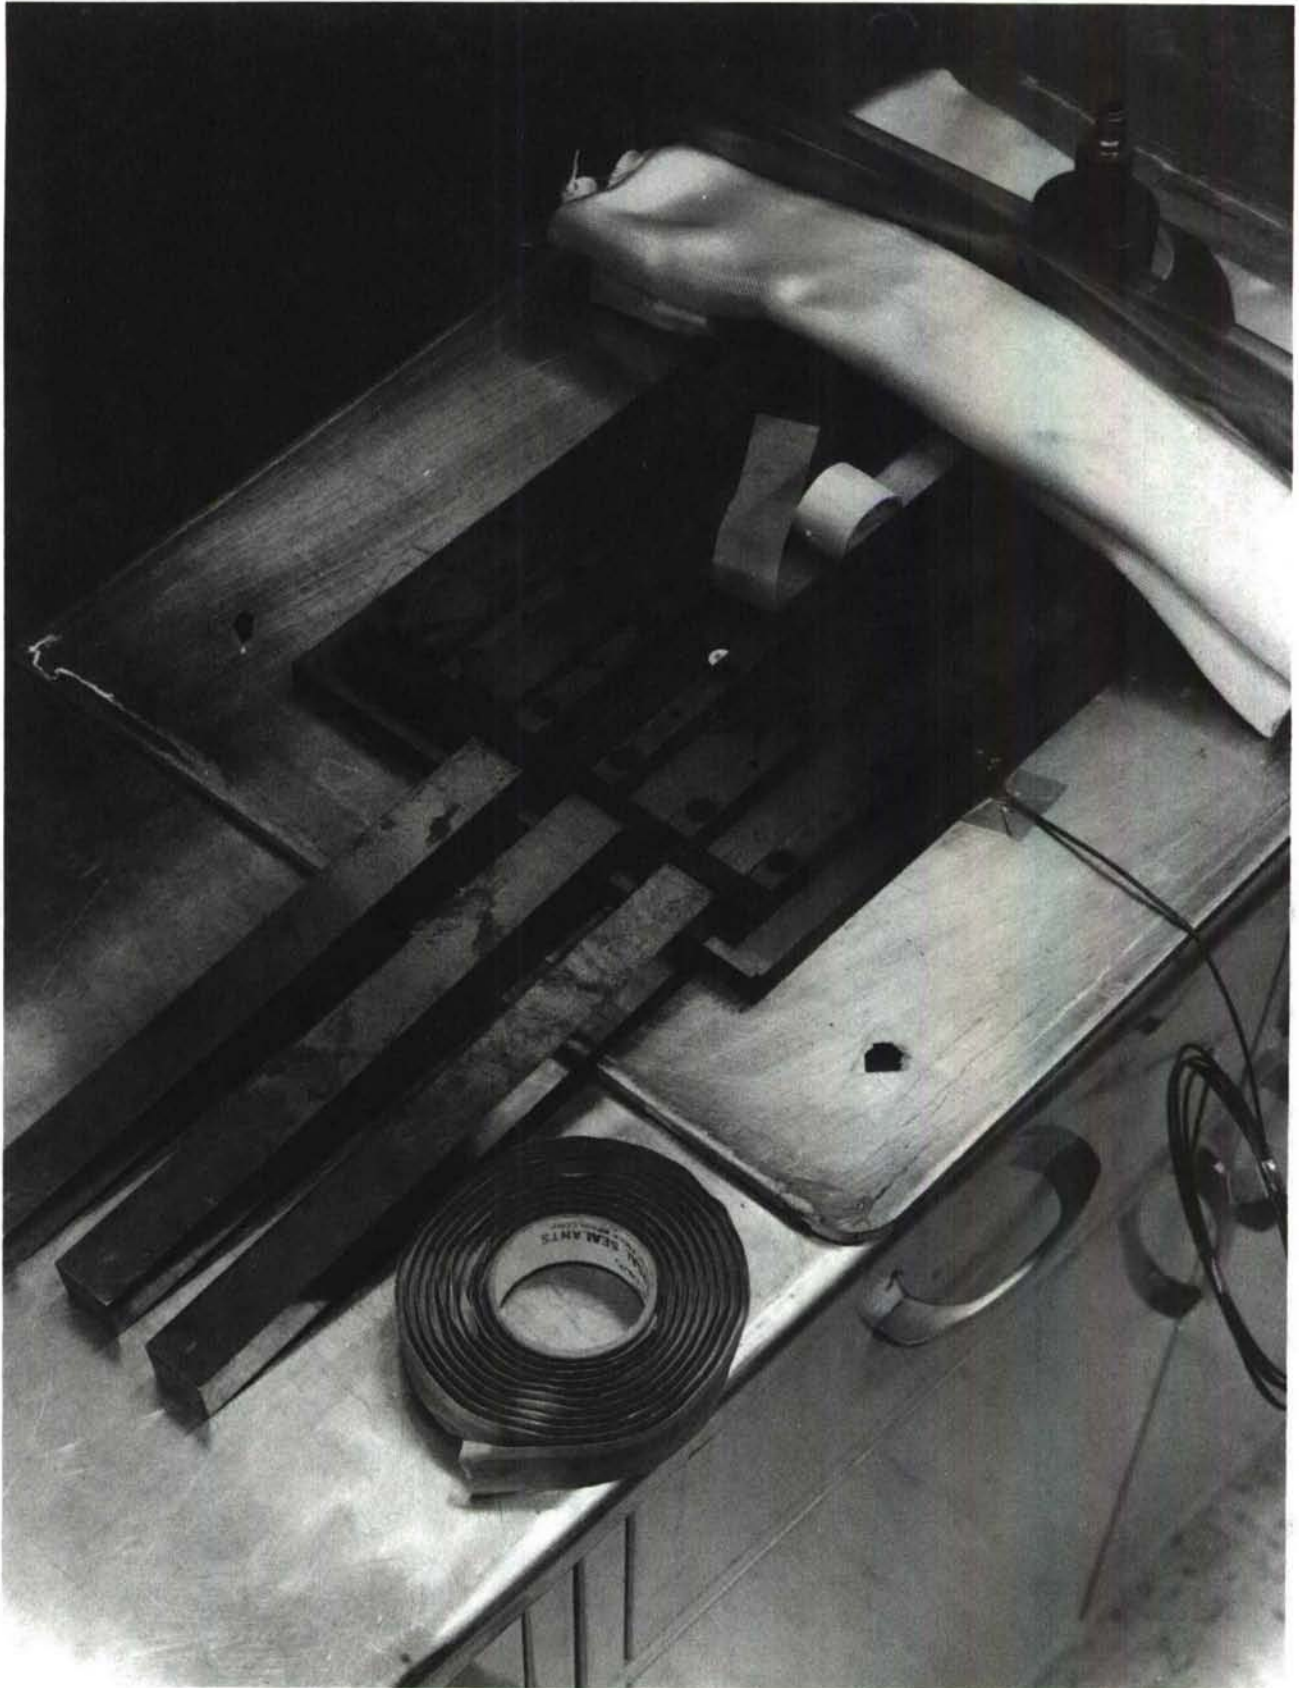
MOLD CAVITY – SPECIMEN INSTALLATION AND BAGGING OPERATION
